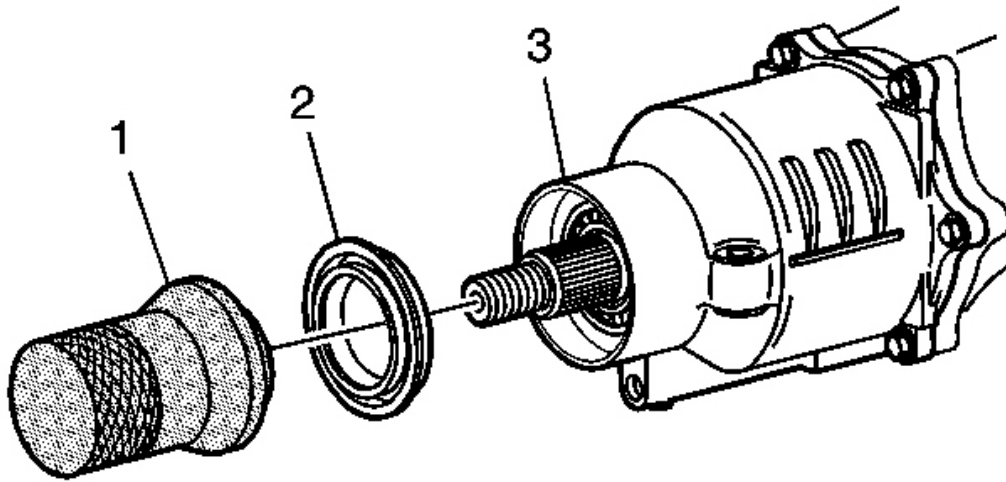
Installing Input Shaft Seal On The Housing Cover
